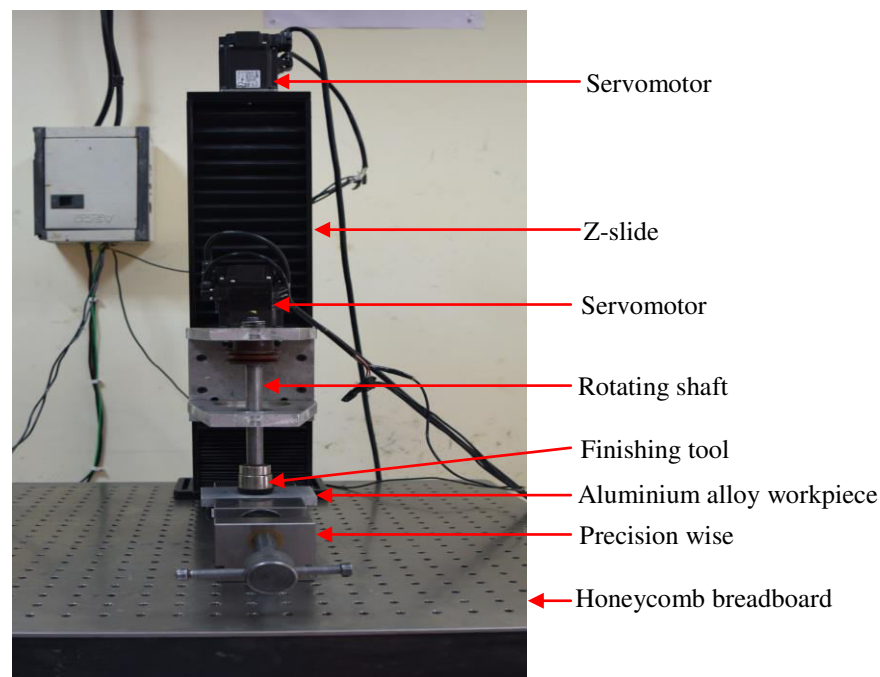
Experimental setup of the magnetorheological finishing tool.
